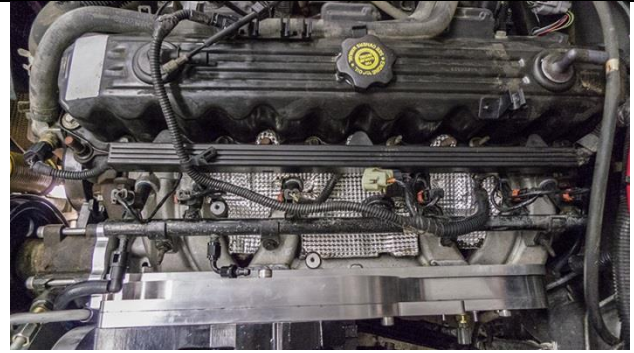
Fuel injectors, fuel rail and fuel line installed.
